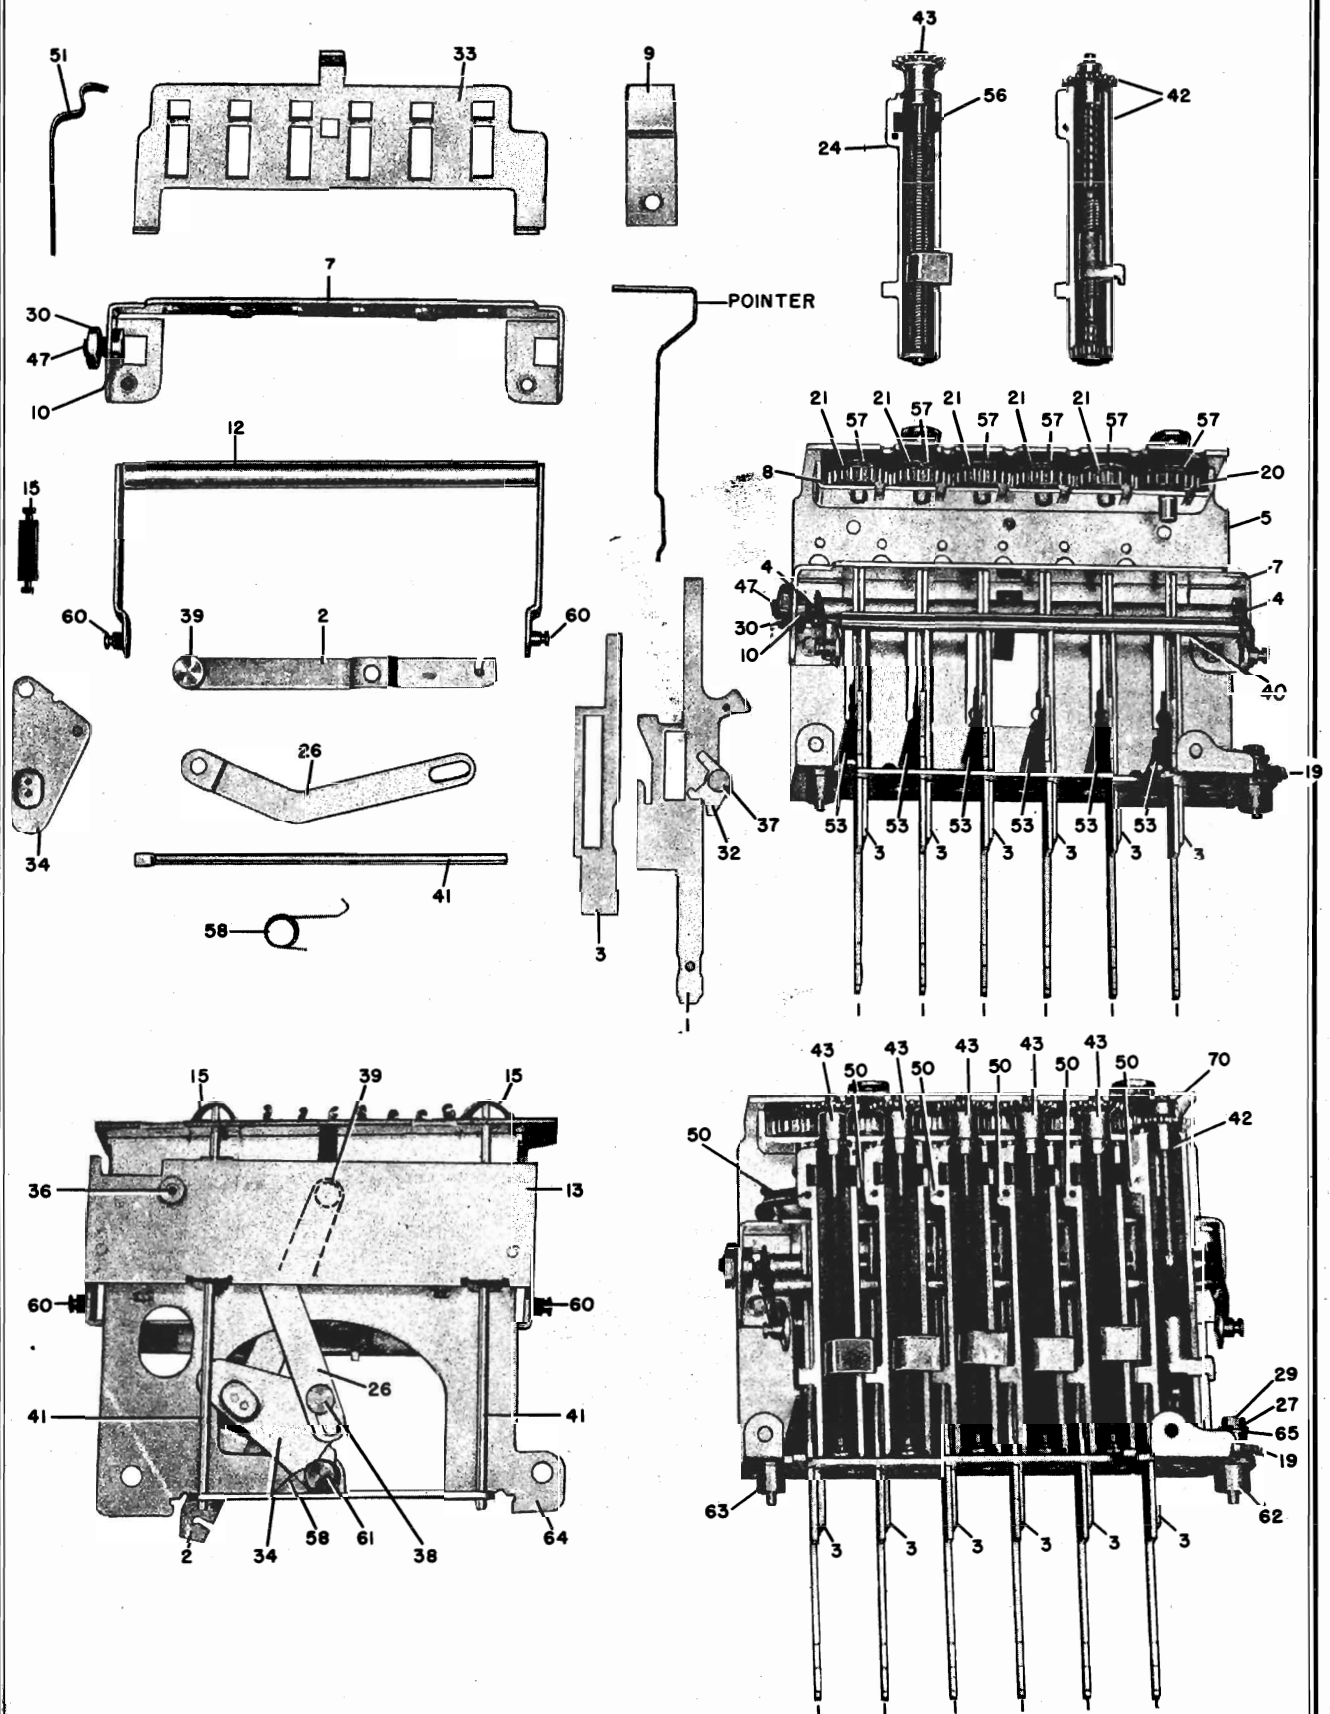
AUTOMATIC TUNER AT-58 PARTS LOCATION
